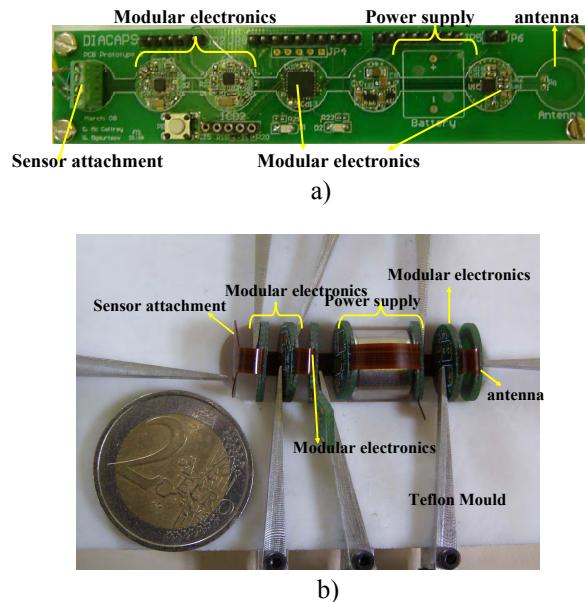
a) PCB electronic system and b) system in serpentine form awaiting encapsulation.
